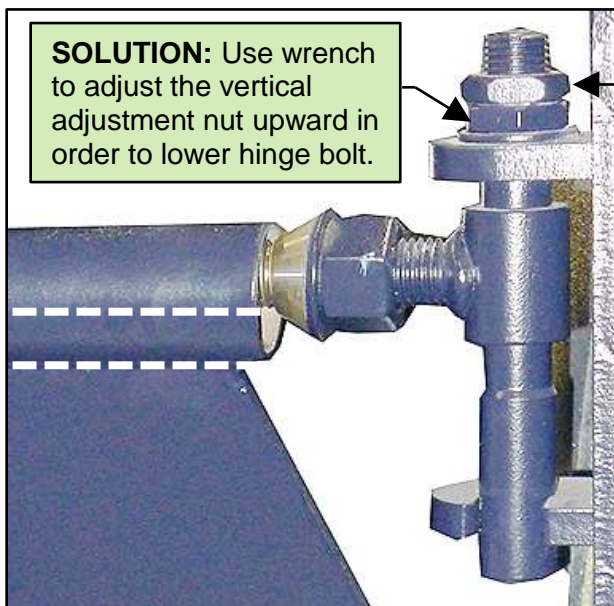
Example Problem for Adjusting Vertical Adjustment Nut on Hinge
